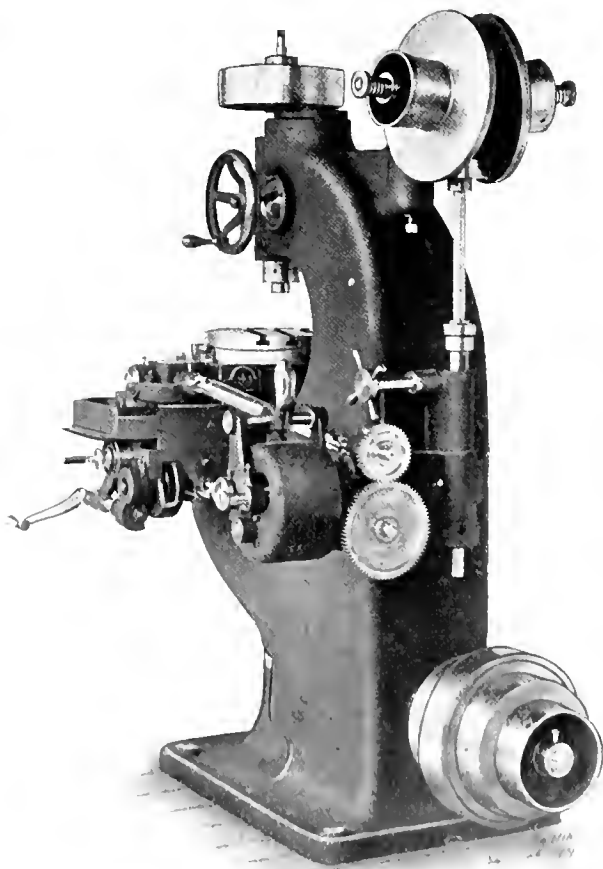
Rear View of Becker Milling Machine, showing Friction Feed
